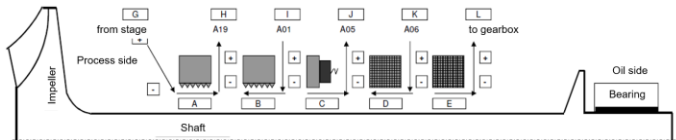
Shaft sealing system of the sCO₂ compressor stage
